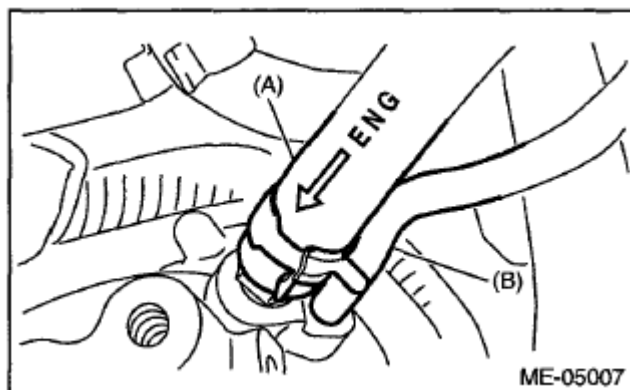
Identifying Brake Booster Vacuum Hose And Pressure Regulator Vacuum Hose
